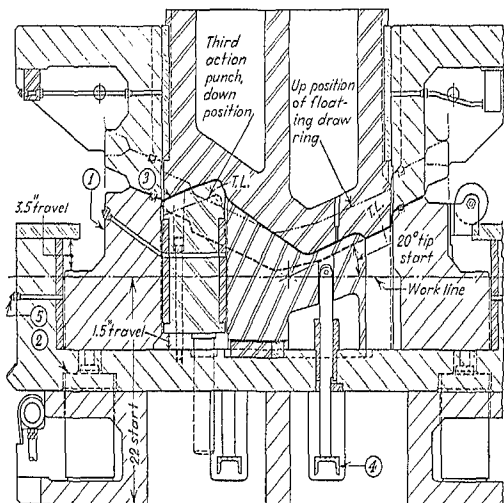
Draw die with a floating draw ring to form a dash panel. (Ford Motor Co.)
